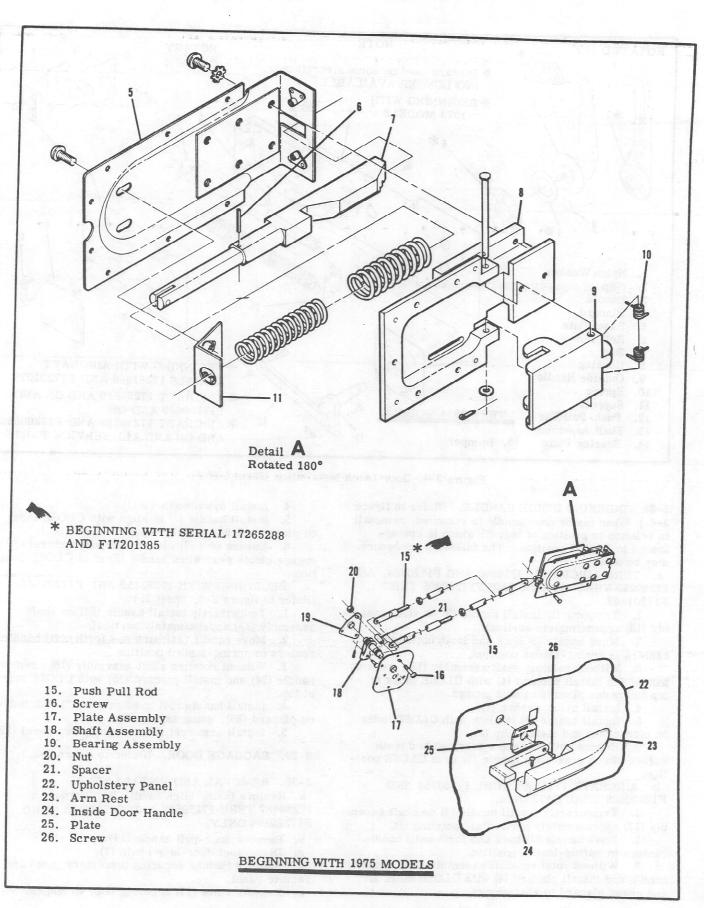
Door Latch Installation (Sheet 2 of 2)
